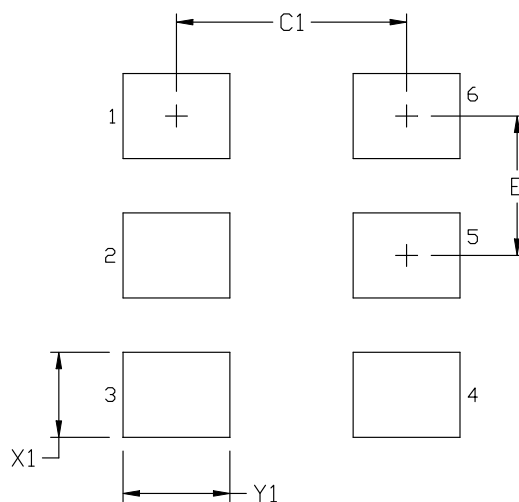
Si566 (5×7 mm) PCB Land Pattern
